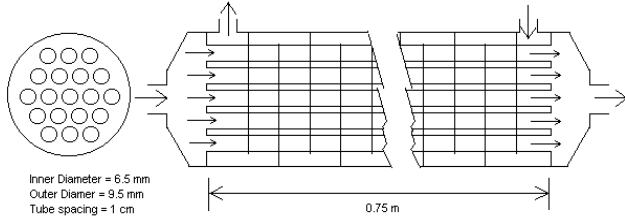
Tube-In-Shell Heat Exchanger Dimensions
